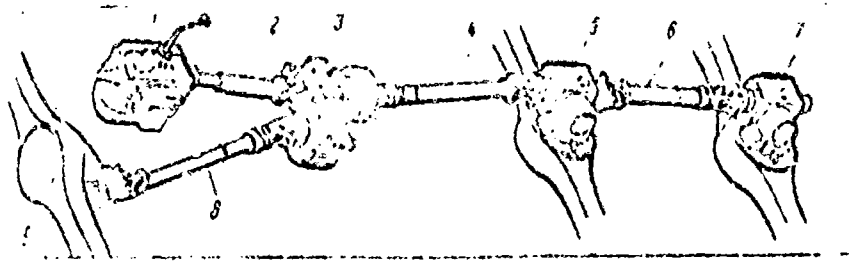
Universal drive of the ZIL-131 motor vehicle:
